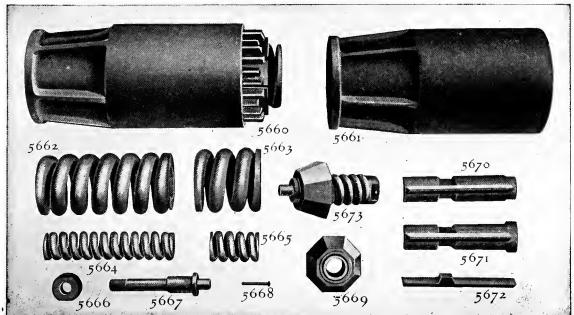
Parts of Westinghouse Friction Draft Gear. Westinghouse Air Brake Company.
